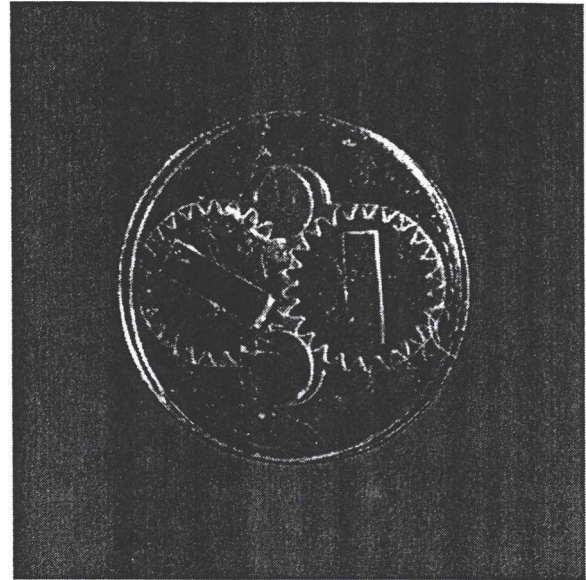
An optical photograph of an assembled in-line gear pump fabricated by SLIGA. The total thickness of the gear pump is 600 μm , 200 μm each for the two end plates and the cavity.
